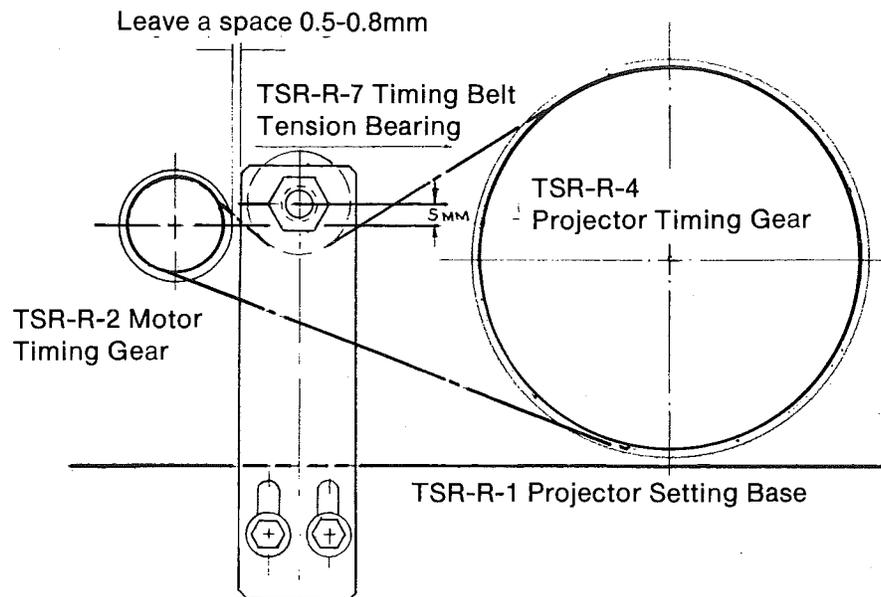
Timing Belt Tension Bearing Setting Point
